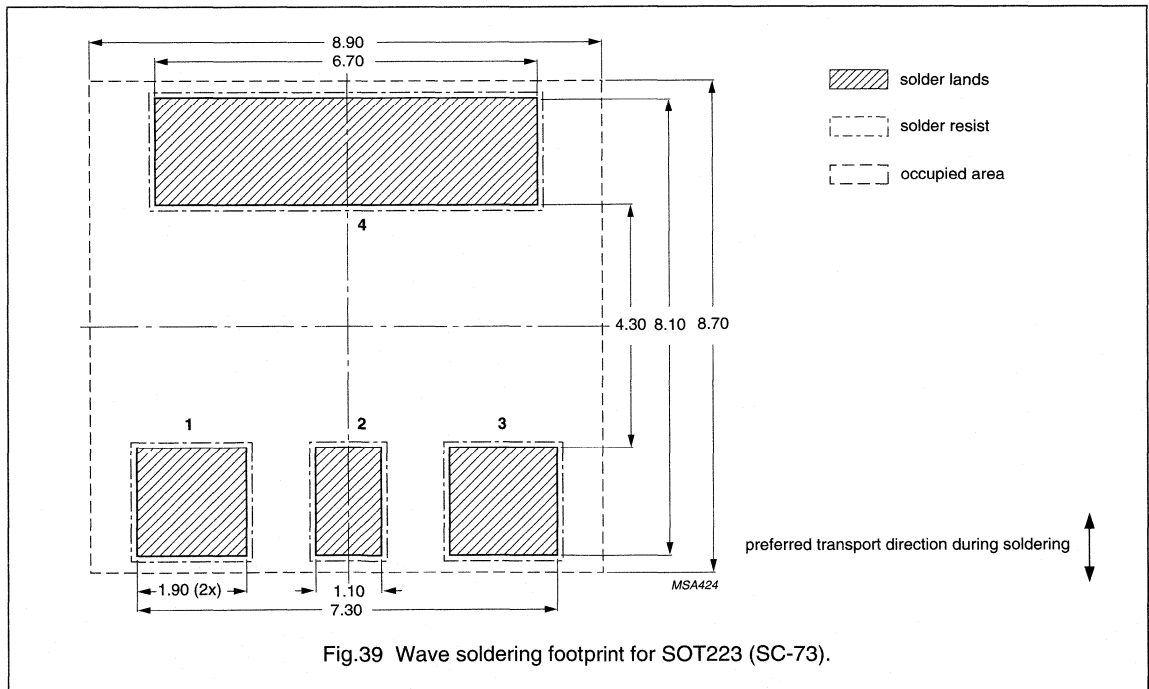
Wave soldering footprint for SOT223 (SC-73).
